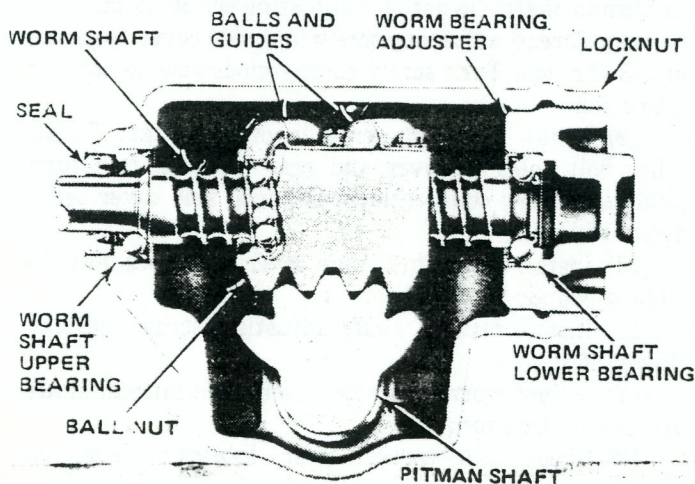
K-1 Recirculating Ball Manual Steering Gear
